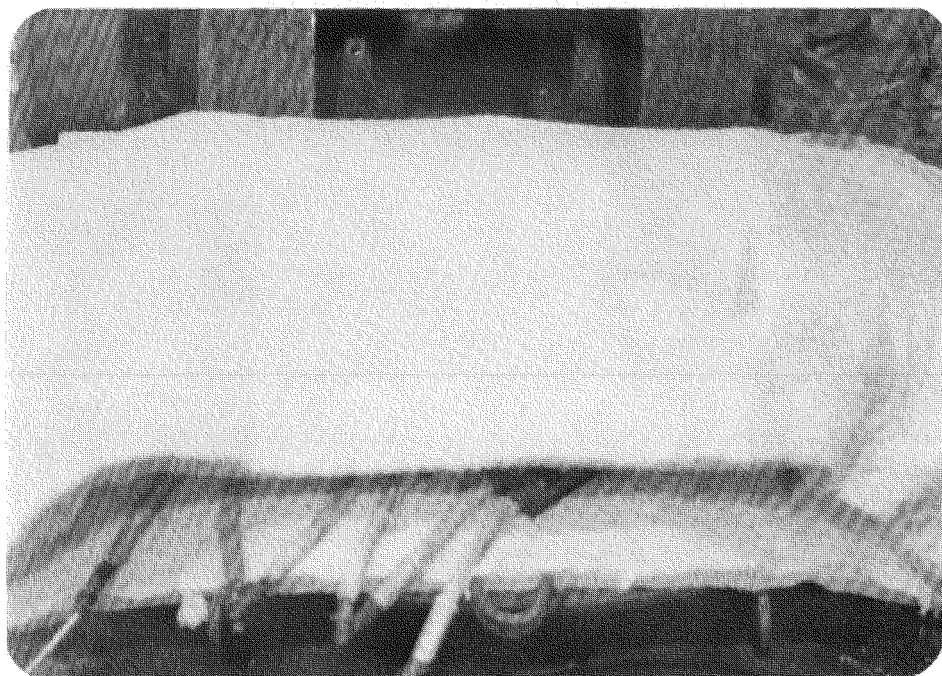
Heat Treatment of Weld Test Plate B
